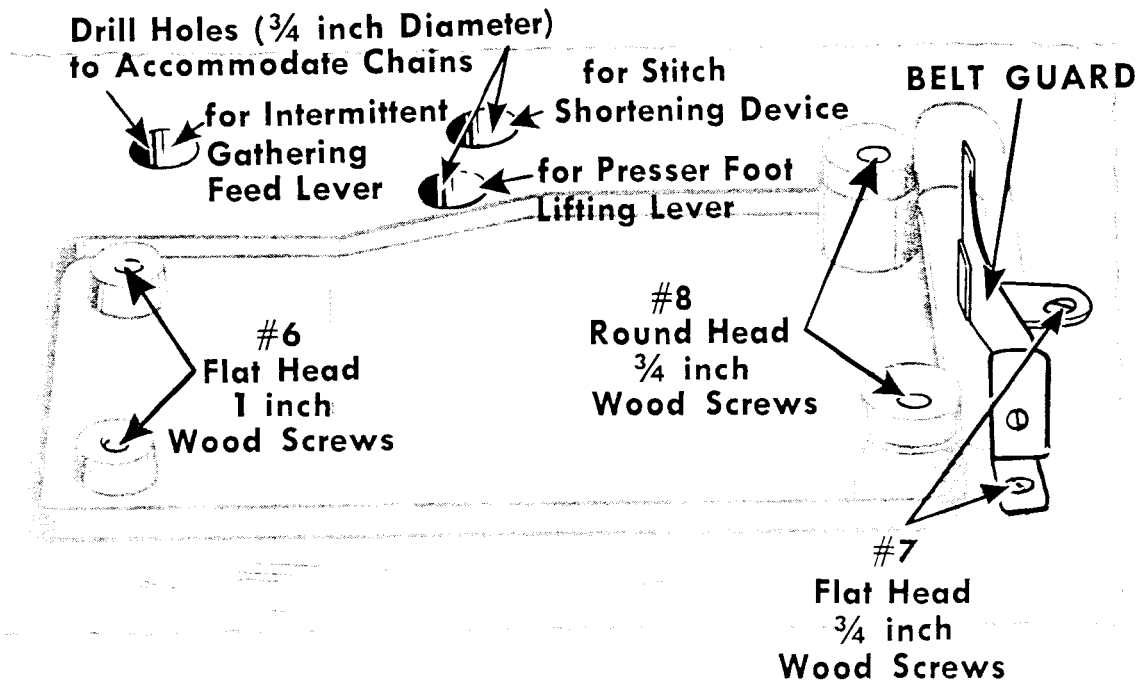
Machine Base on Table, Showing Position and Drill Sizes of Holes Required for Installation
